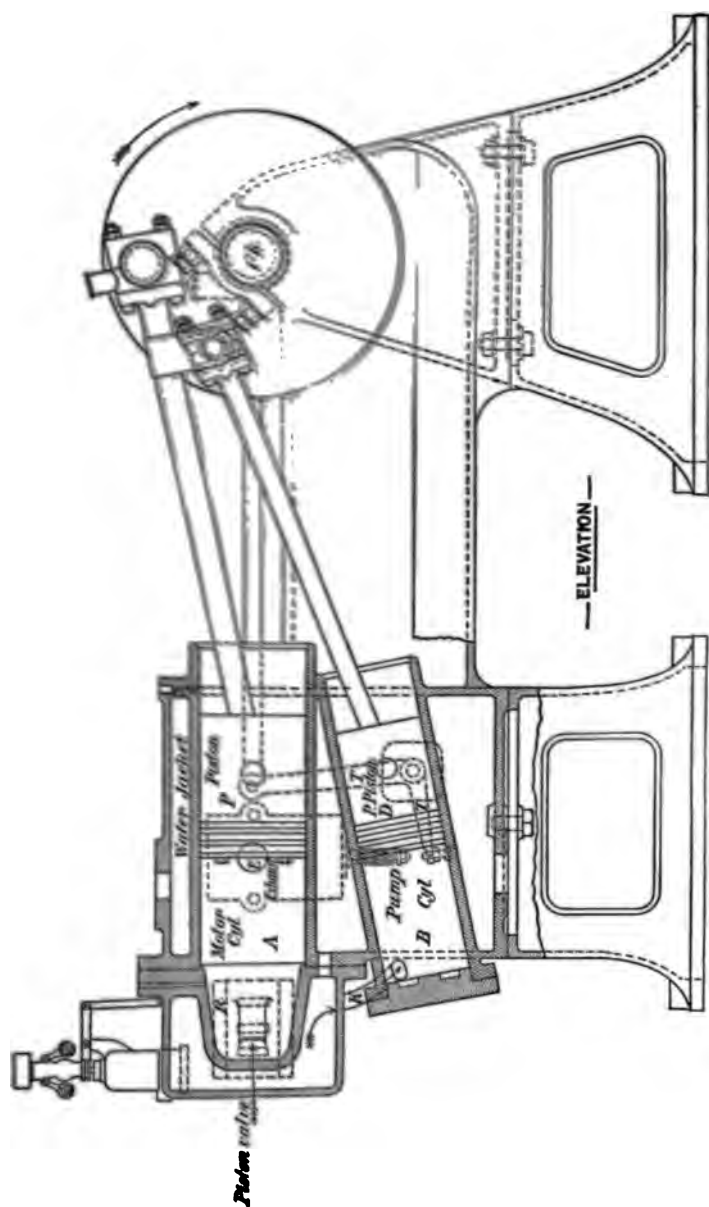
Fawcett Gas Engine—Sectional Elevation.
